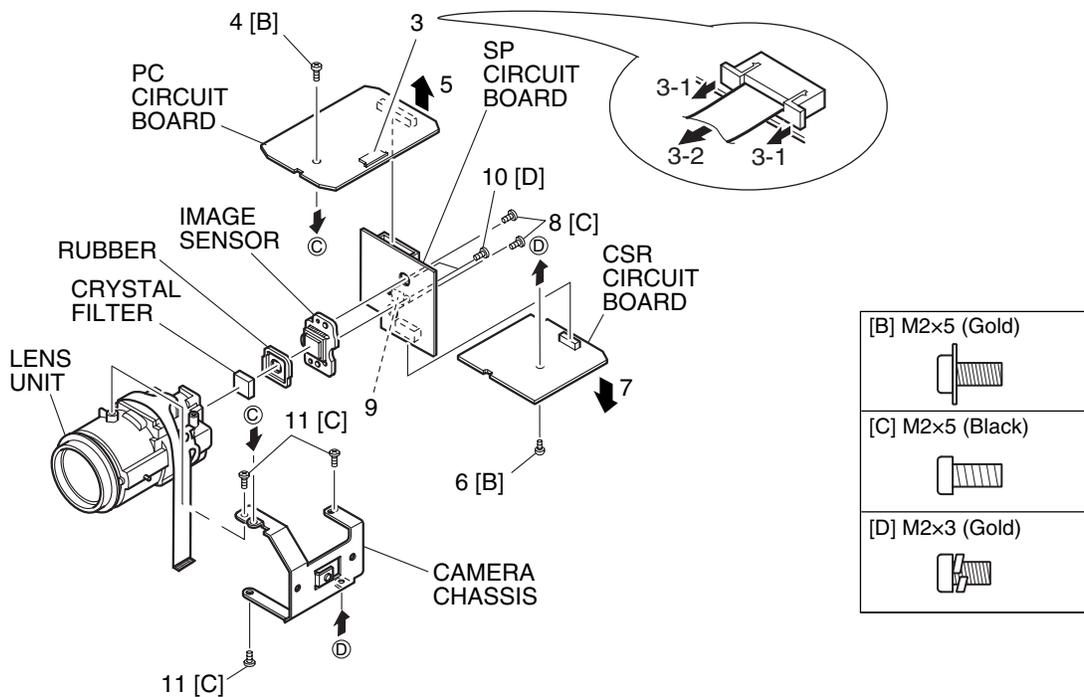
PC, CSR, SP Circuit Boards, Image Sensor and Lens Unit
